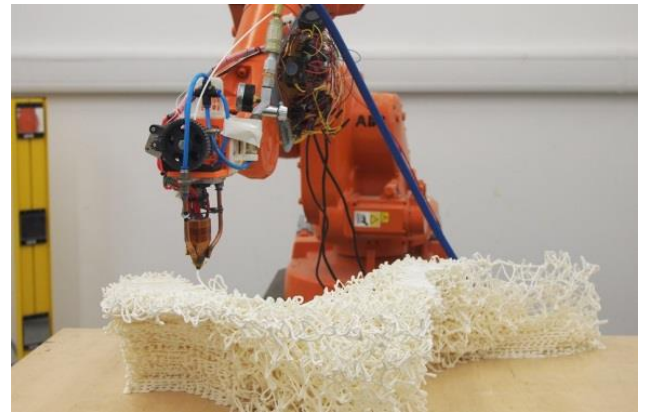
Pieces of furniture manufactured with 3D printer [9]
